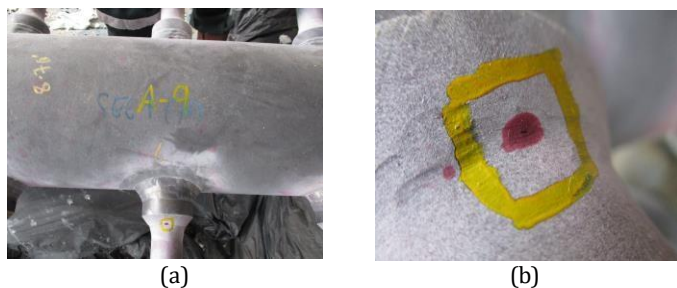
Hot collector weldolet of joint C, (a) general views, (b) showing the rounded dye penetrant finding of 6 mm, facing south and the location at 12 o'clock.
